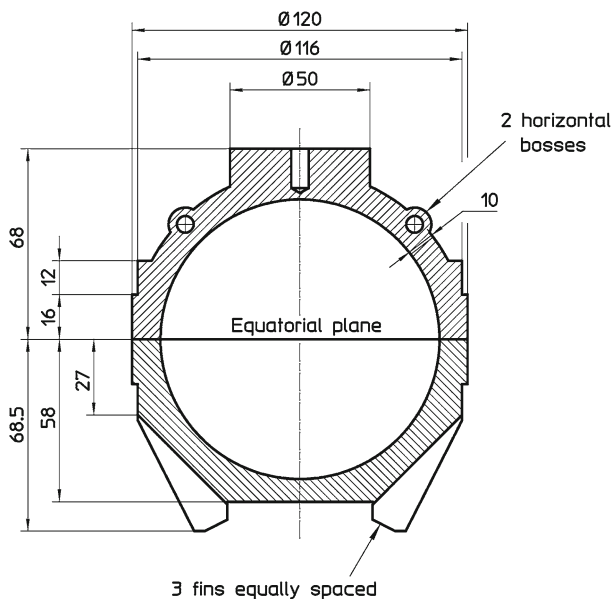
Cut view giving the dimensions (in mm) of the outer surfaces. Contrary to the drawing, the bosses and fins were not in the same cross section
